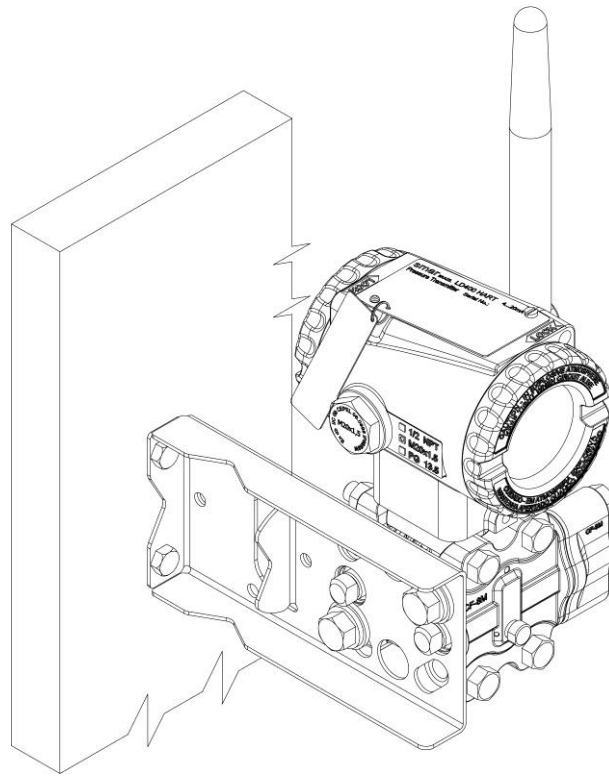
(g) – Dimensional Drawing and Mounting Position for the LD400 WirelessHART™ – Pressure Transmitter with Extended Probe
